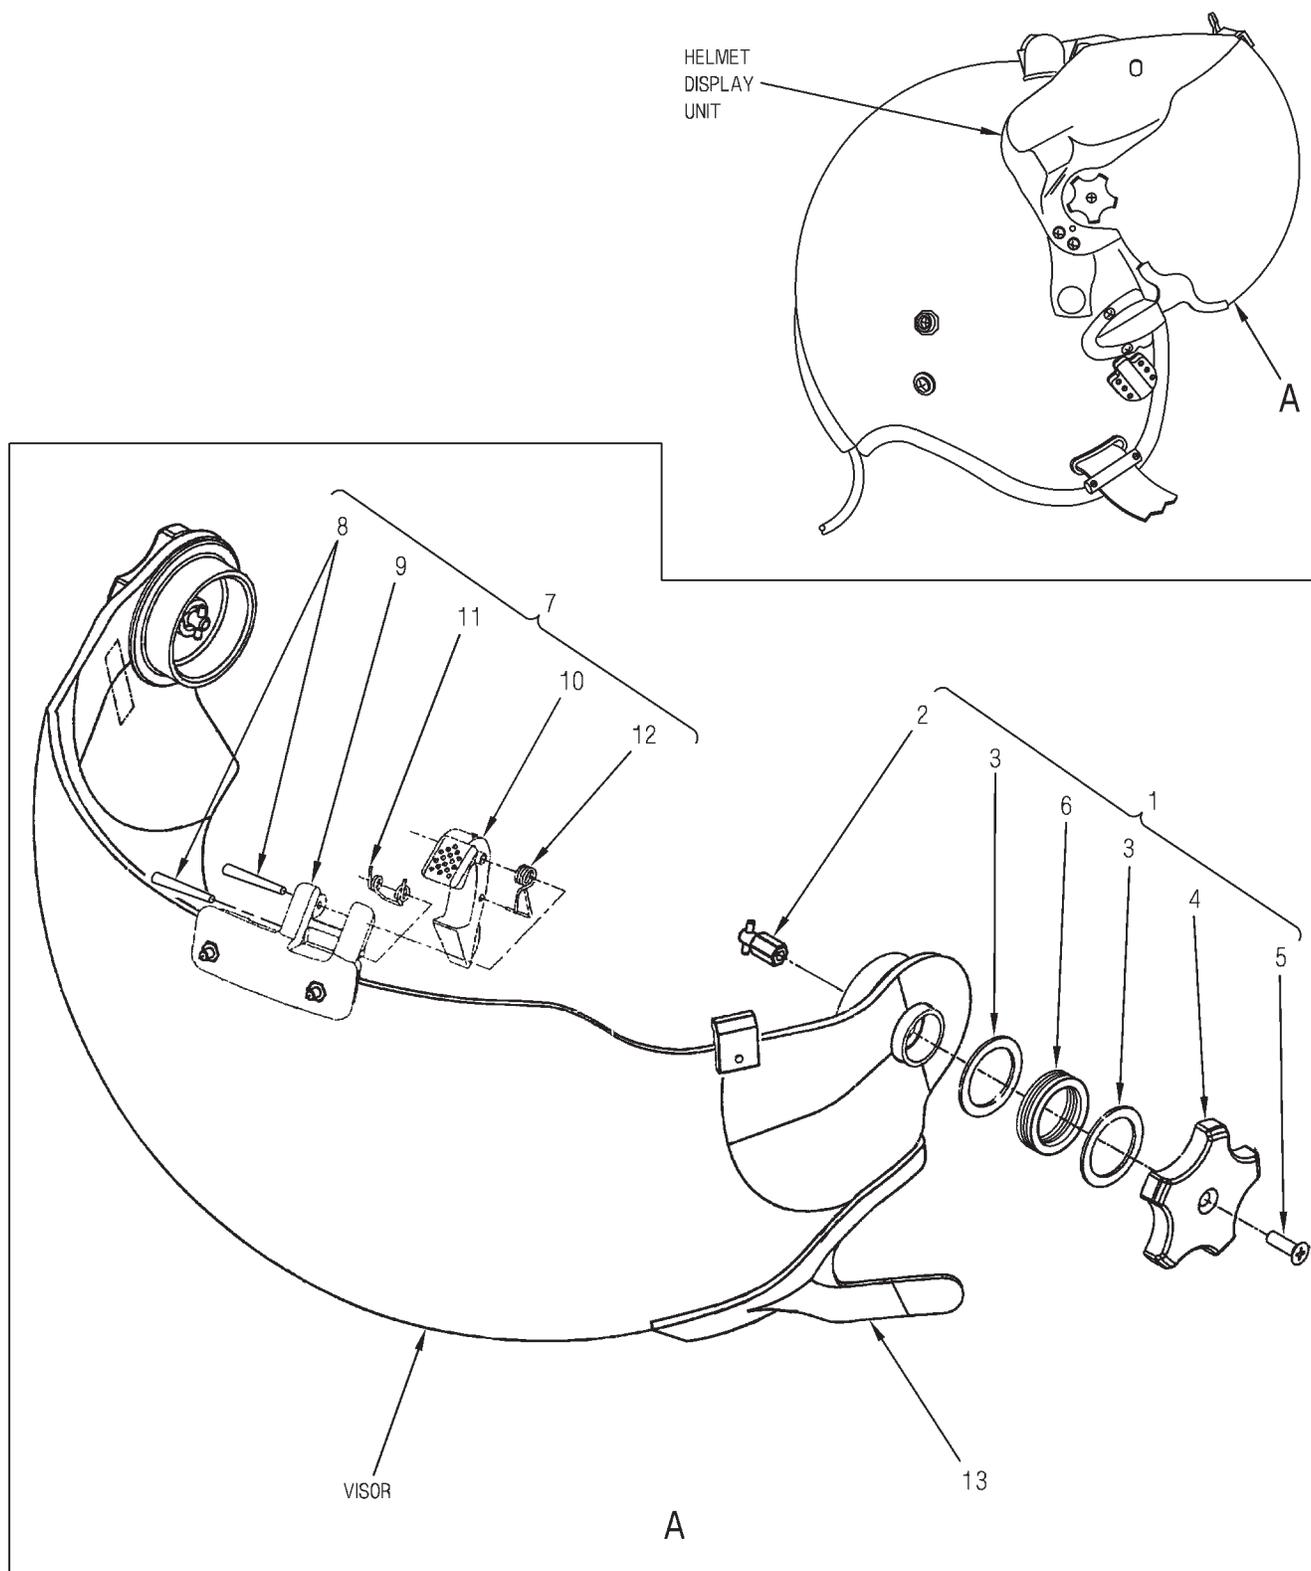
Visor Assembly, Part Numbers 620530-01-00, 620530-03-03 and 620530-01-05 (Sheet 1 of 2)
